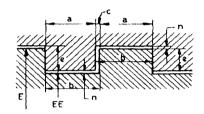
SCREWED FLUSH BUTT JOINTS WITH SQUARE FORM THREAD PARALLEL SCREWING
